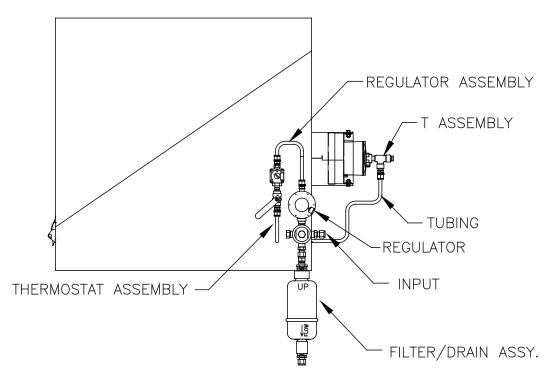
Regulator and Filter/Drain Assembly Installed
